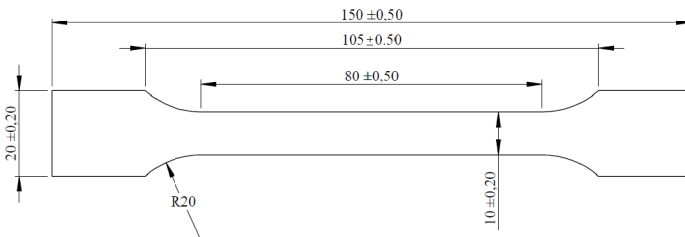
Shape and dimensions of the specimen, according to ISO 527-2 standard
